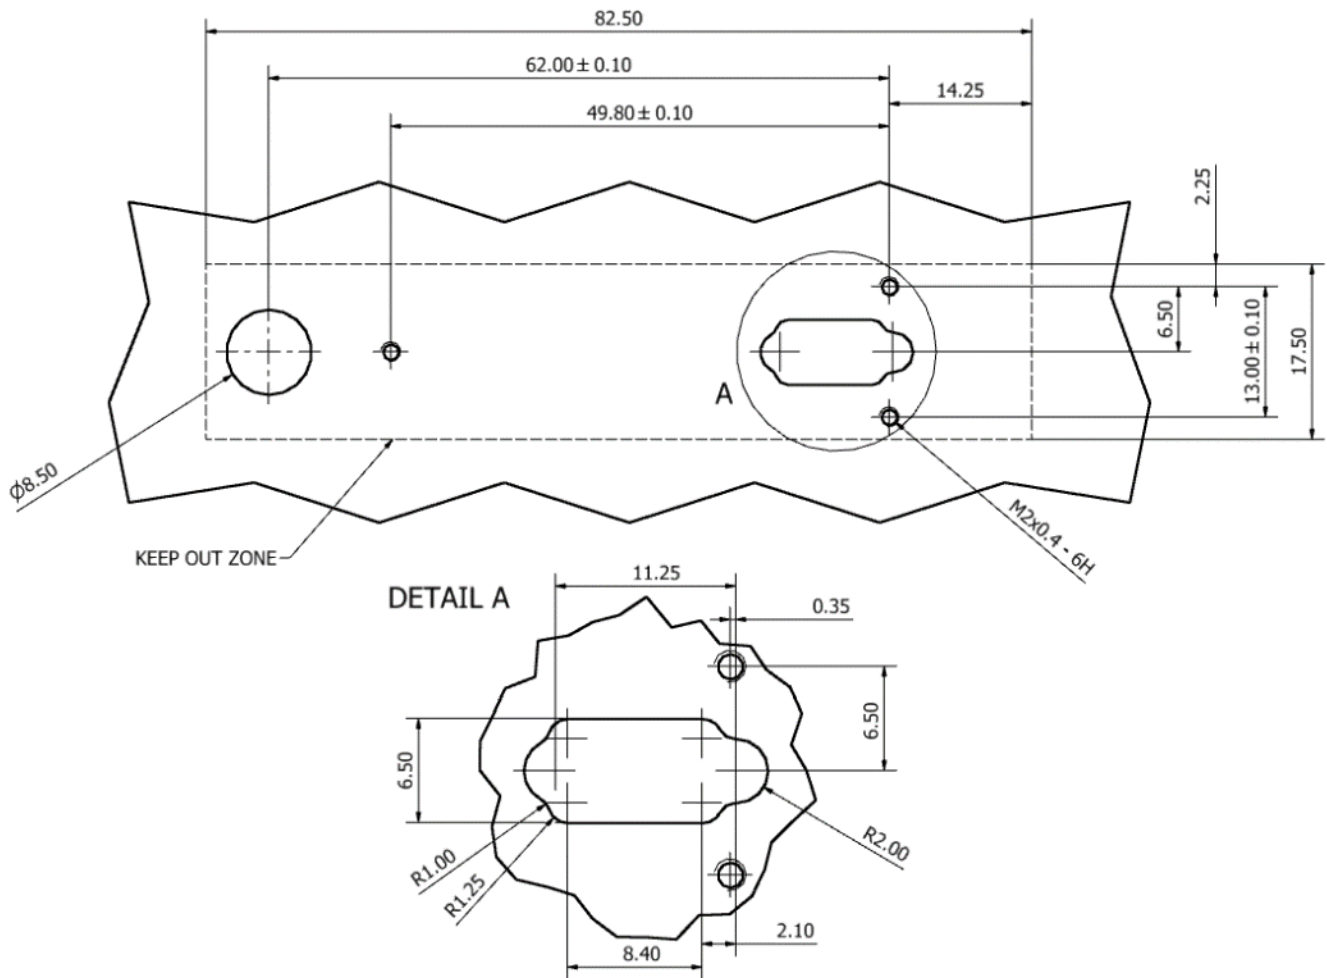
Panel Cut-Outs Required to Mount CubeMag Deployable
